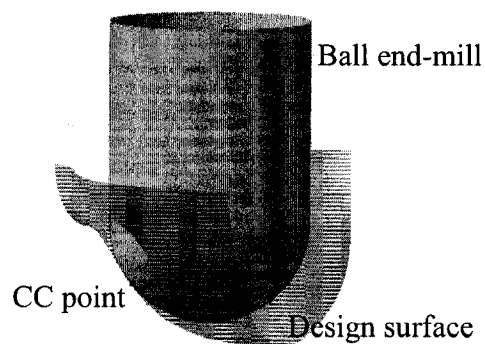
Gouging: a ball end-mill cuts into the design surface
